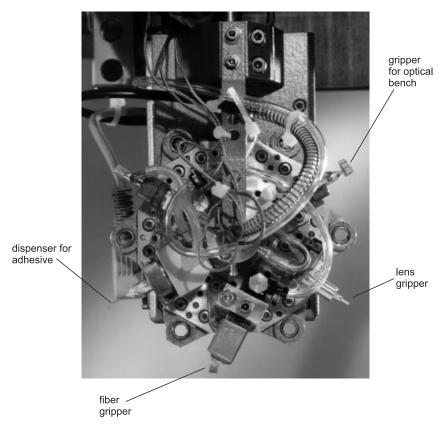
Tool turret carrying grippers and a dispenser.
